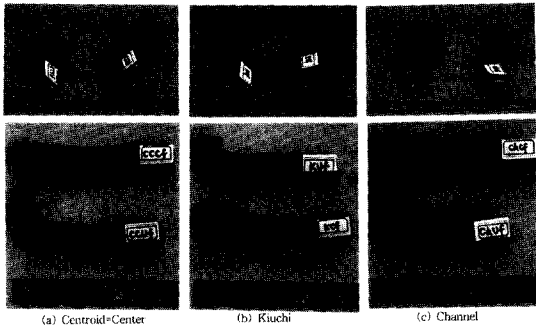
Shapes of products extruded through conical bearing land with flow guide
